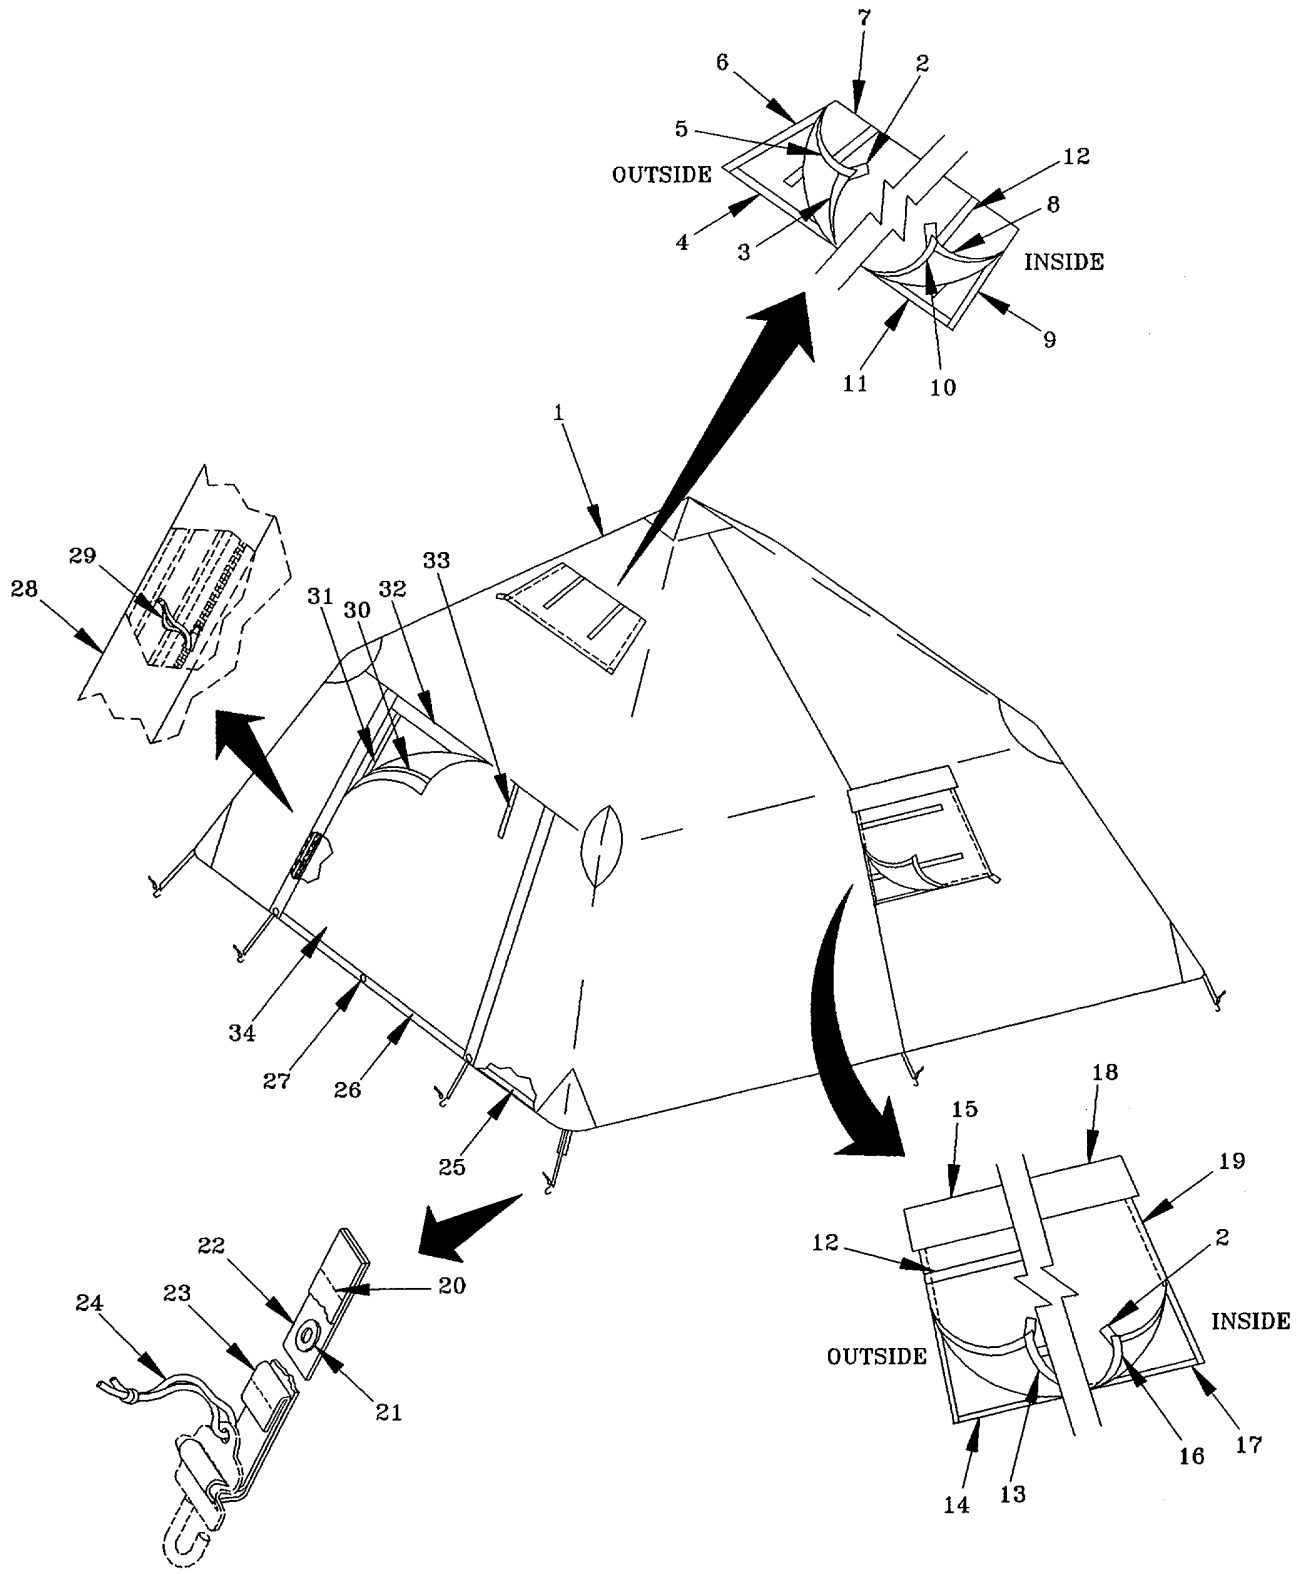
FLY ASSEMBLY (Sheet 1 of 2)
